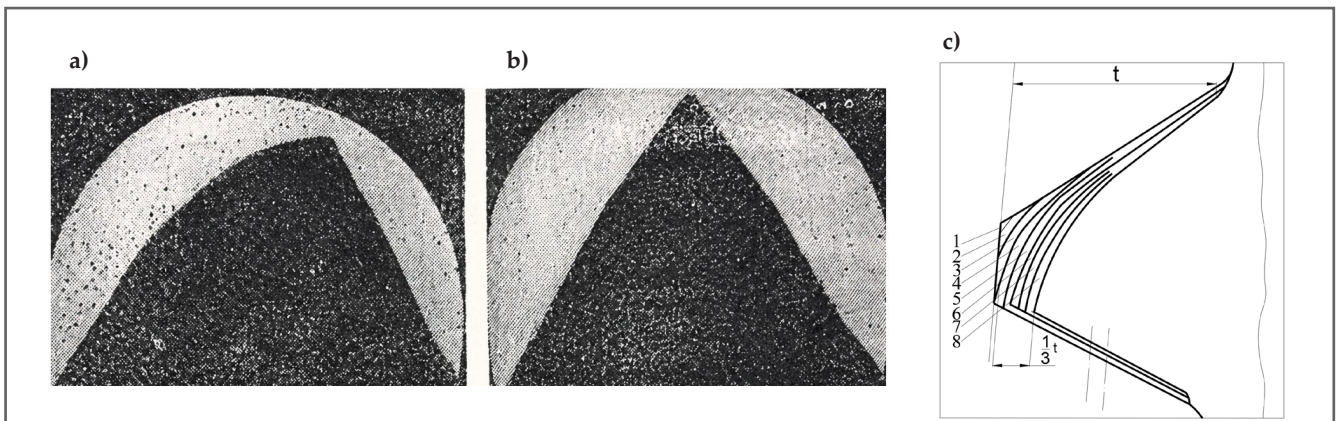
Worn thread turns (a and b) of tool joint threads during repeated make-up, tightening, release from tightening, and break-out, and the wear scheme (c) of the tool joint thread
